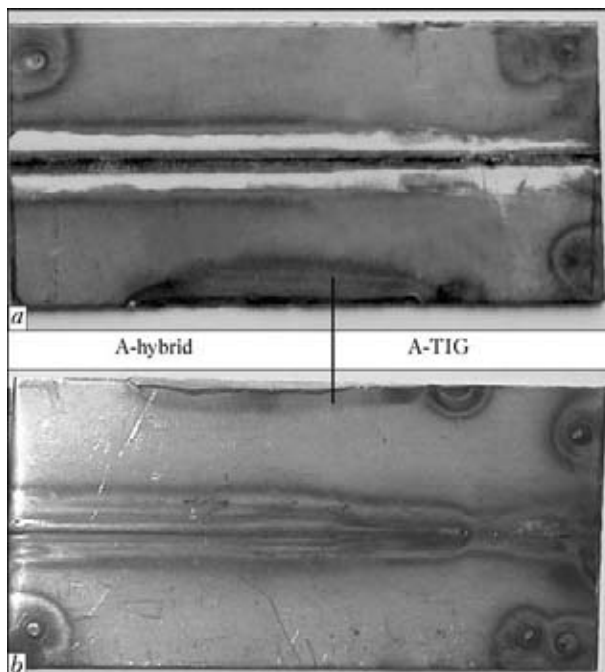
Top (a) and back (b) view of welded samples 1.5 mm thick ($P_L = 250$ W, $I_a = 20$ A, $v_w = 100$ mm/min, with flux)
